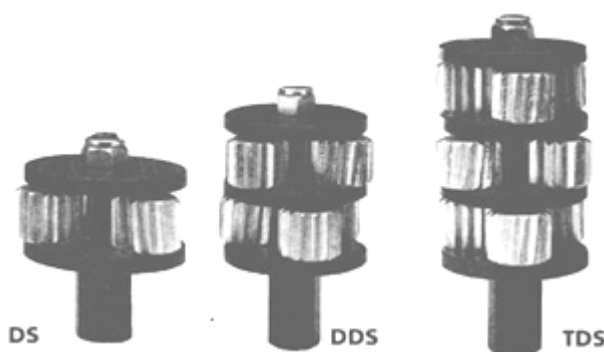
Tool heads: cutters. The DS and DDS cutters are not used frequently in the sugar industry.
